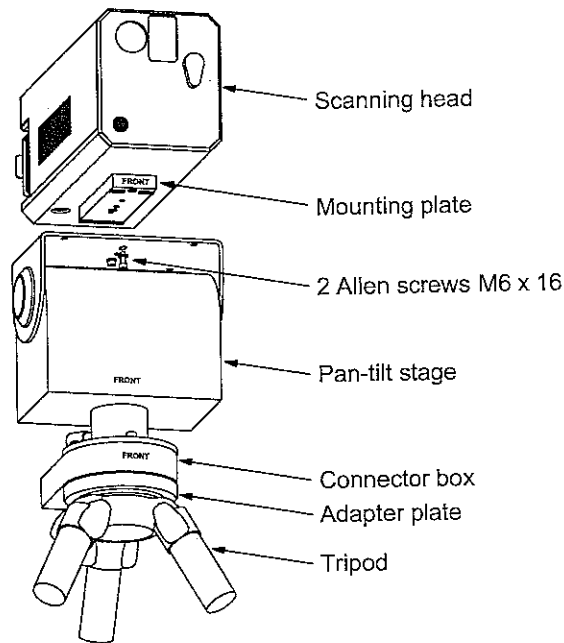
Mounting the scanning head on the pan-tilt stage
